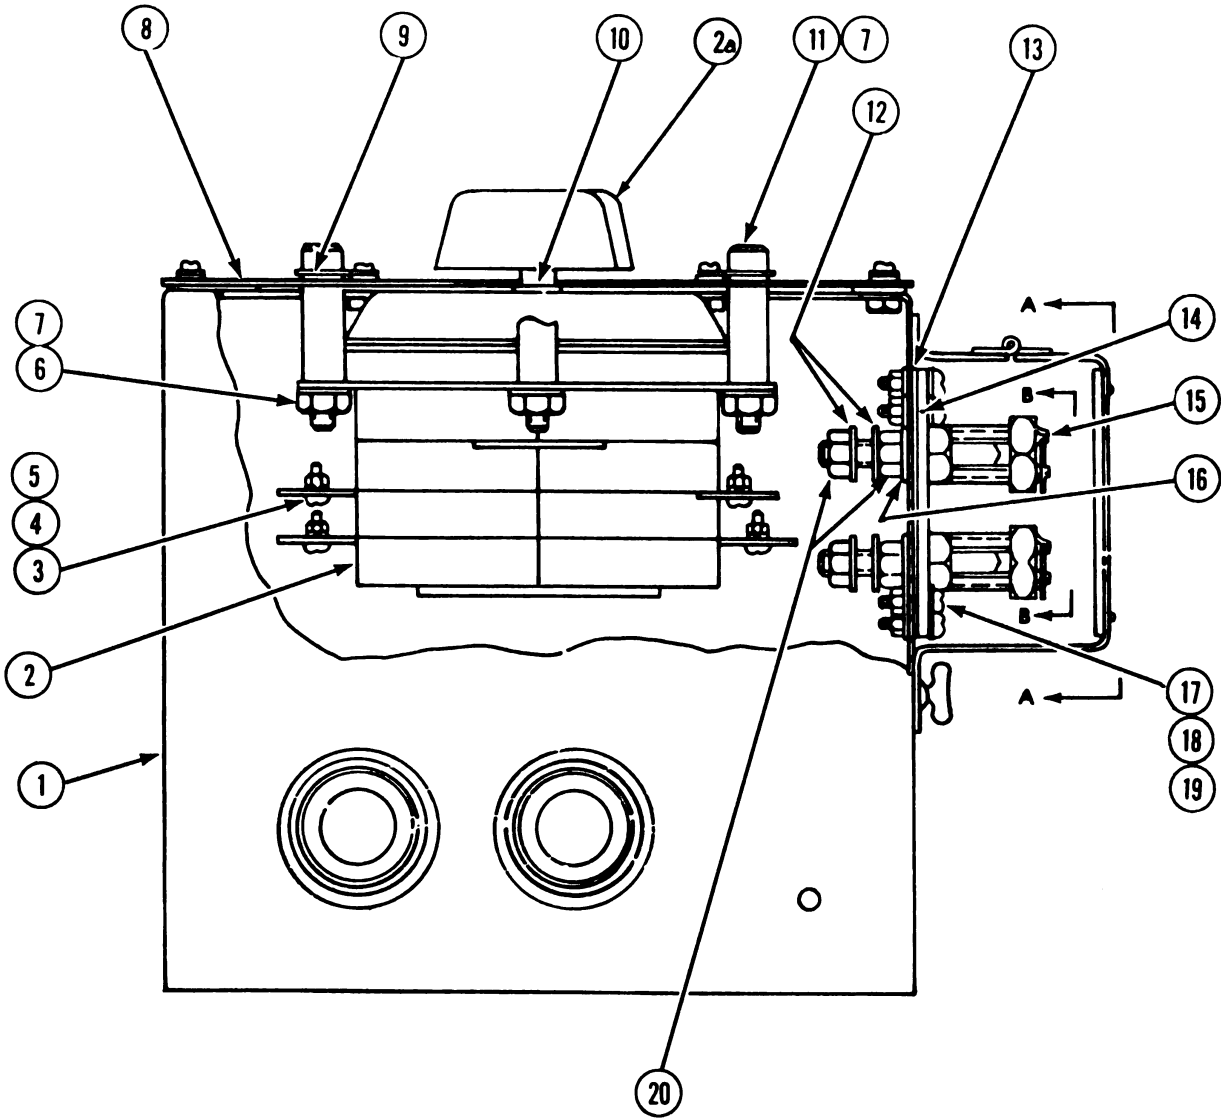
Switchbox Assembly (Sheet 1 of 3)
